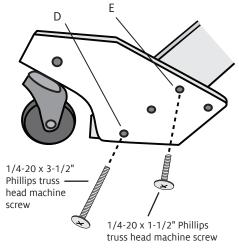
FRONT CASTER BLOCK AND INSIDE LEG
